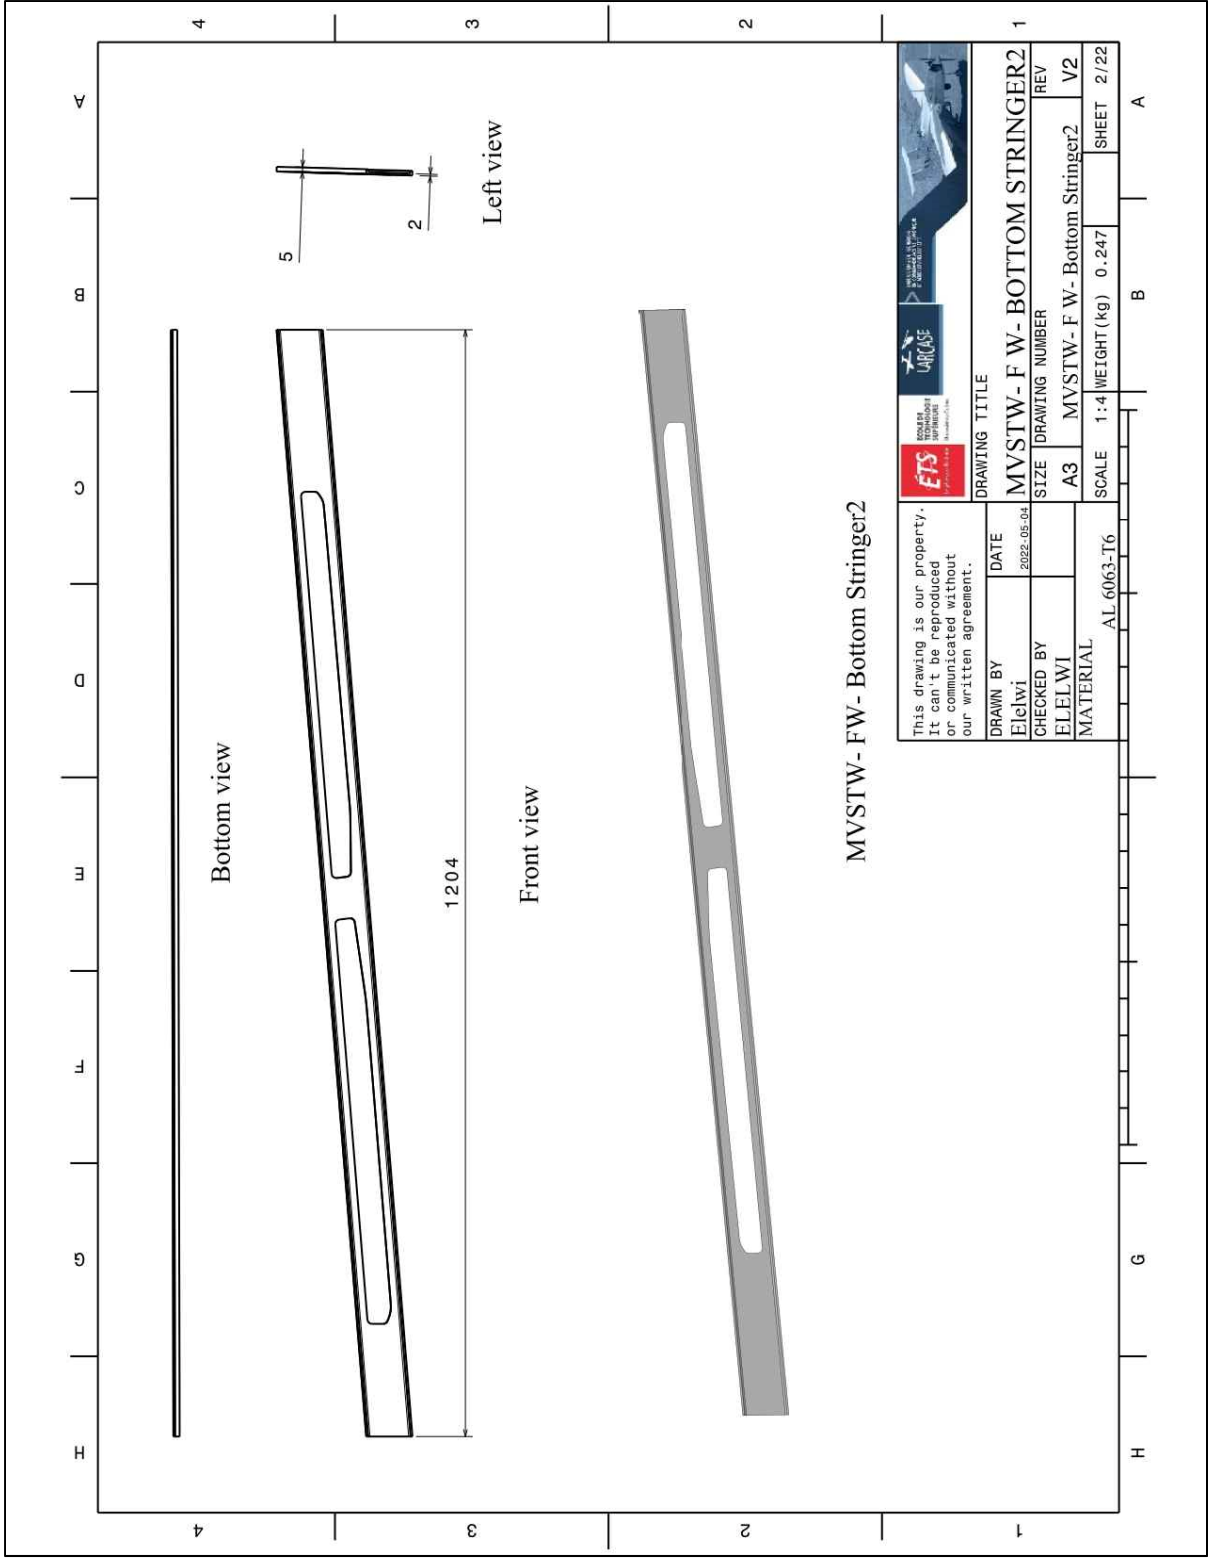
MVSTW Fixed Wing Bottom Stringer2 Using Al 6063-T6
